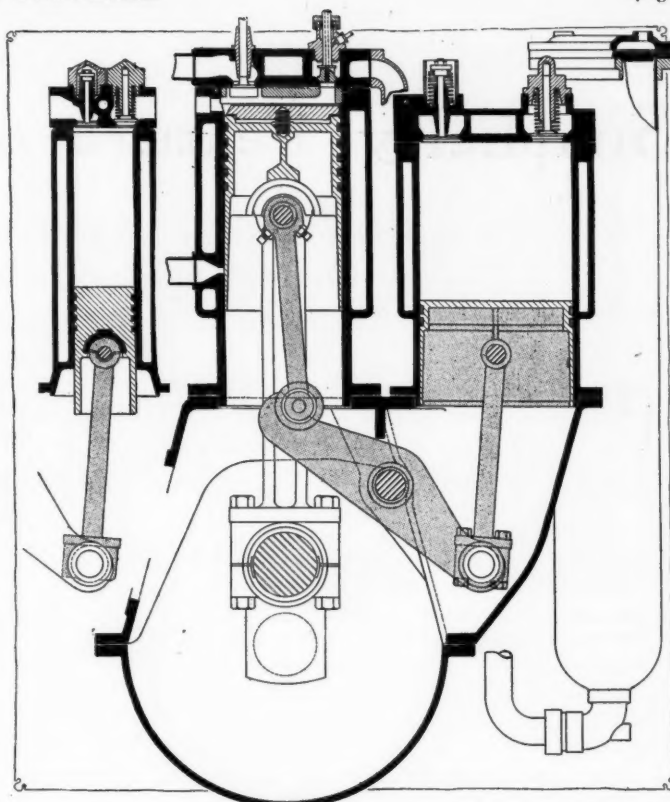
At extreme left—Section through high-pressure cylinder of air pump. Center—Power cylinder. Right—Low-pressure air cylinder. The compressor pistons are operated from the crankshaft
